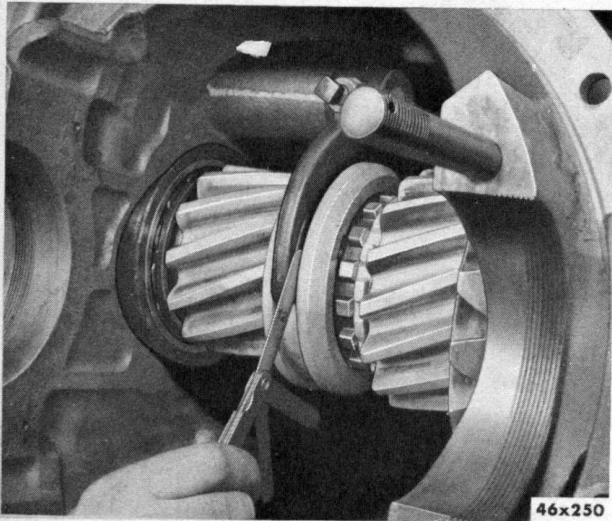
Checking Clearance of Shift Fork in Shift Collar
